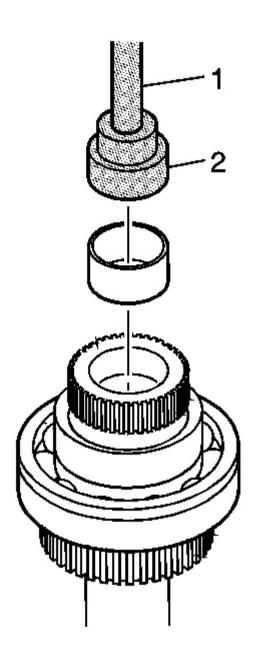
Installing Mainshaft Rear Support Bushing In Rear Output Shaft Courtesy of GENERAL MOTORS CORP.
